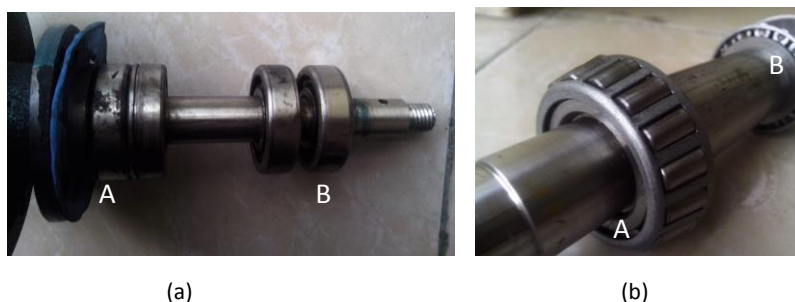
The bearing system at: (a) the SME pump shaft and (b) imported pump shaft.
